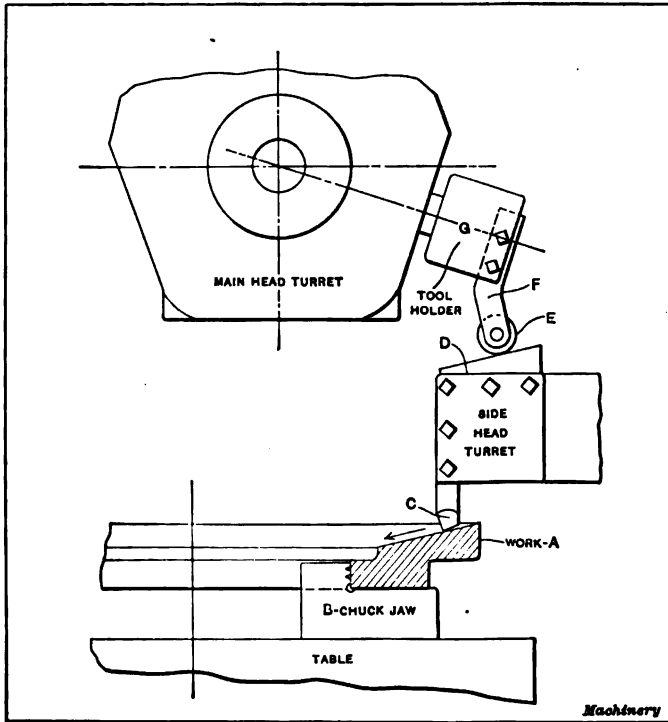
Emergency Taper Attachment for Vertical Turret Lathe Work
